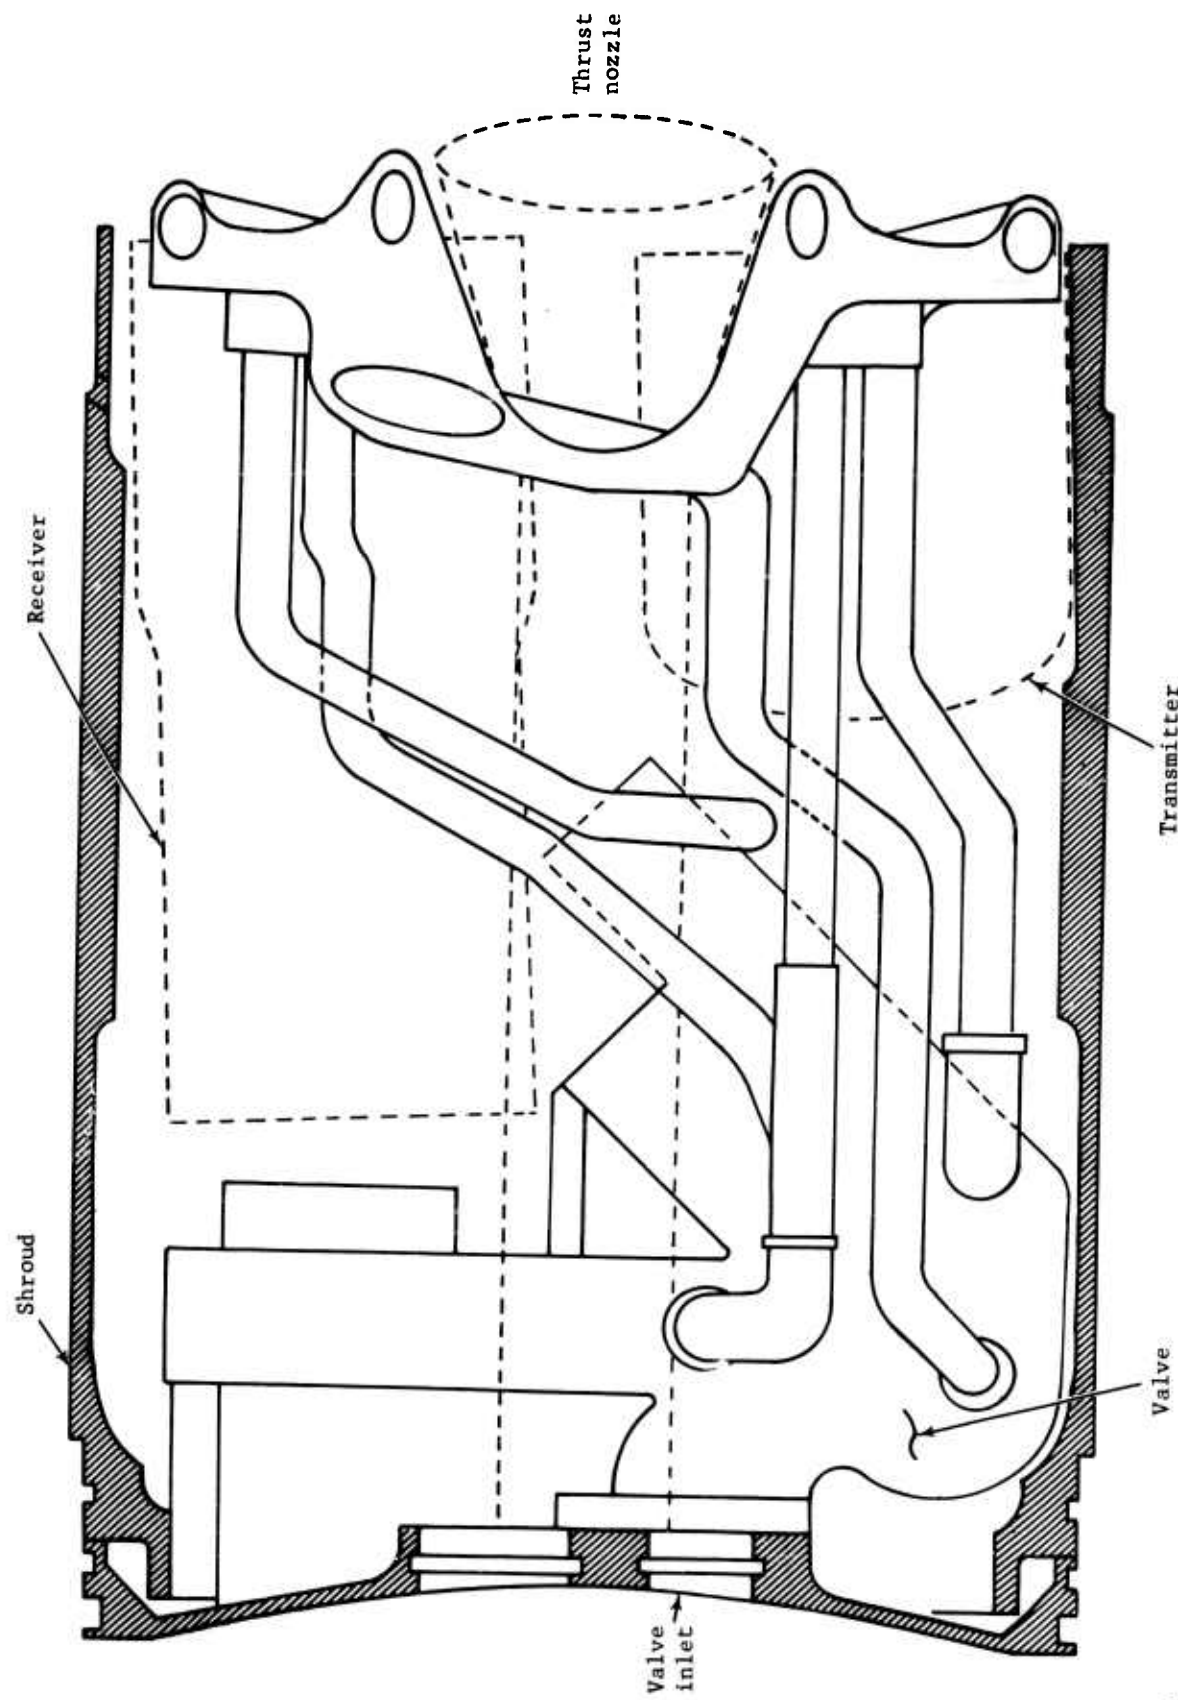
SHILLELAGH AFT SECTION SIDE VIEW
